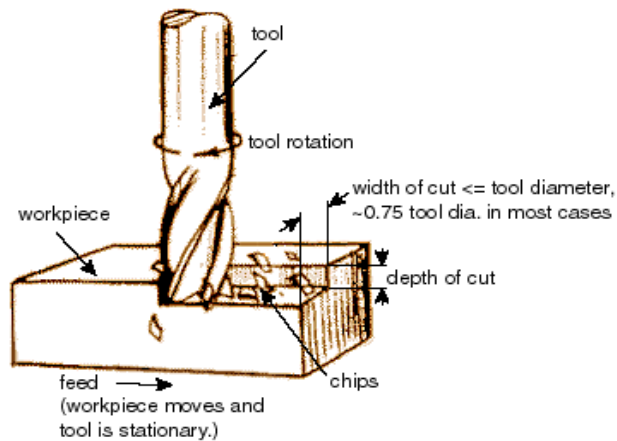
Milling [retrieved from http://www.efunda.com/processes/machining/images/mill/end_milling_2.gif]
